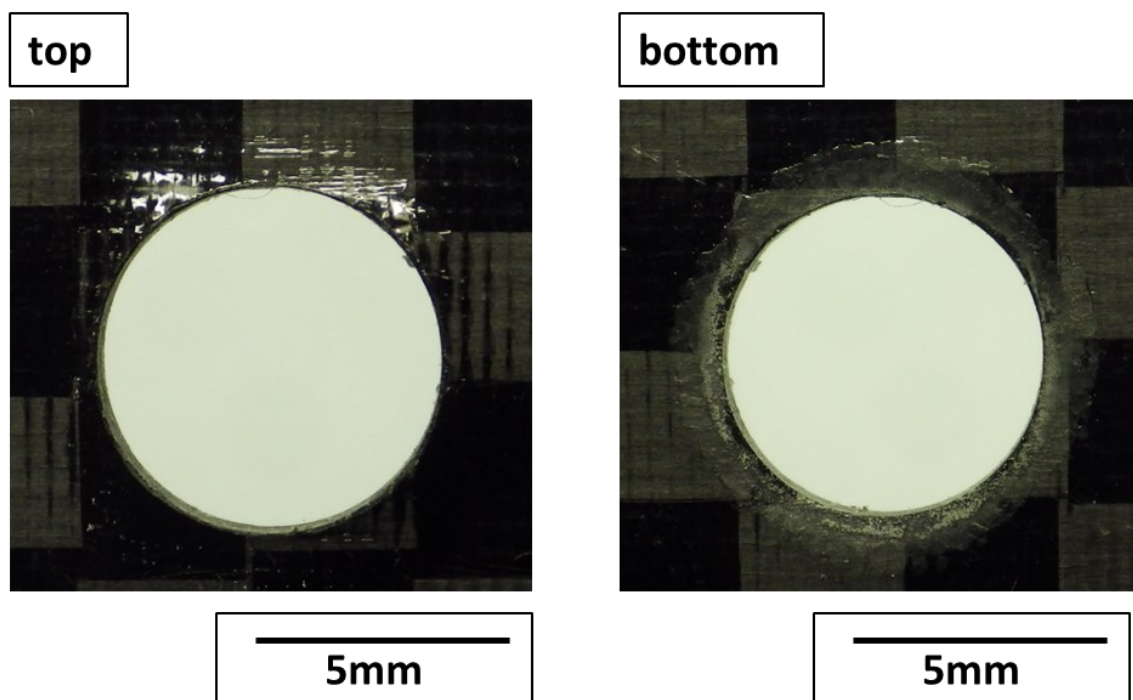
Machined hole surface[500W,0.50mm/s]
